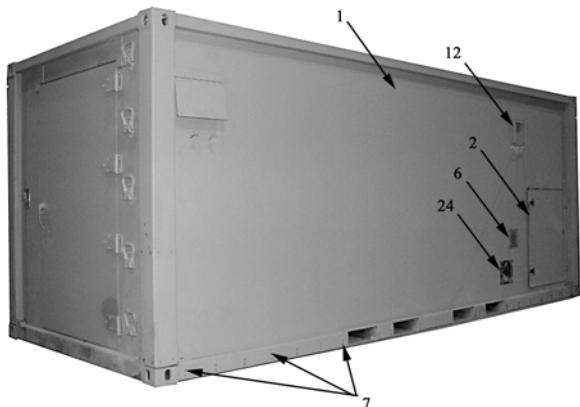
Group 0401, Right-hand Sidewall (Outside) (Sheet 1 of 2)
